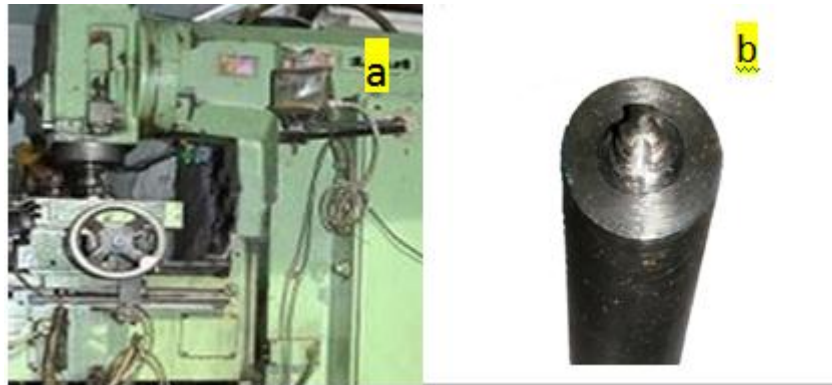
Equipment for friction stir processing: (a) milling machine of friction stir processing. (b) The FSP tool.
